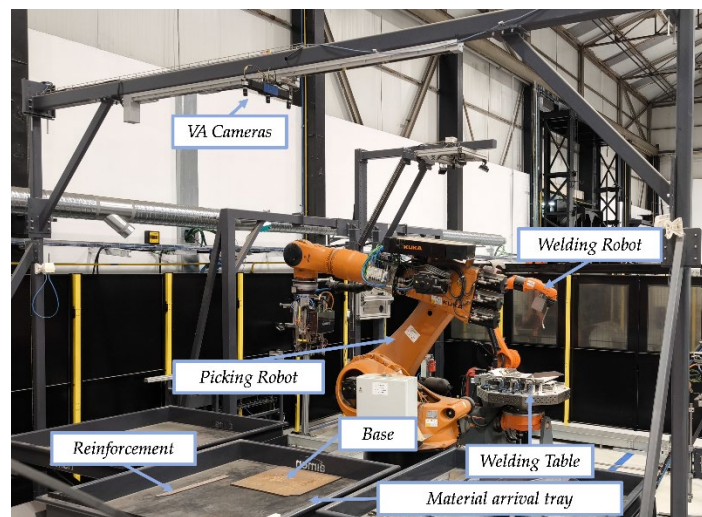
Real-world robotic welding cell with labeled components. Image courtesy of Navantia©
